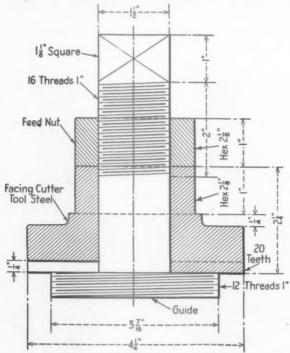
A tool for re-seating the cap seat for the upper discharge valve of an 8½-in. cross-compound air compressor
